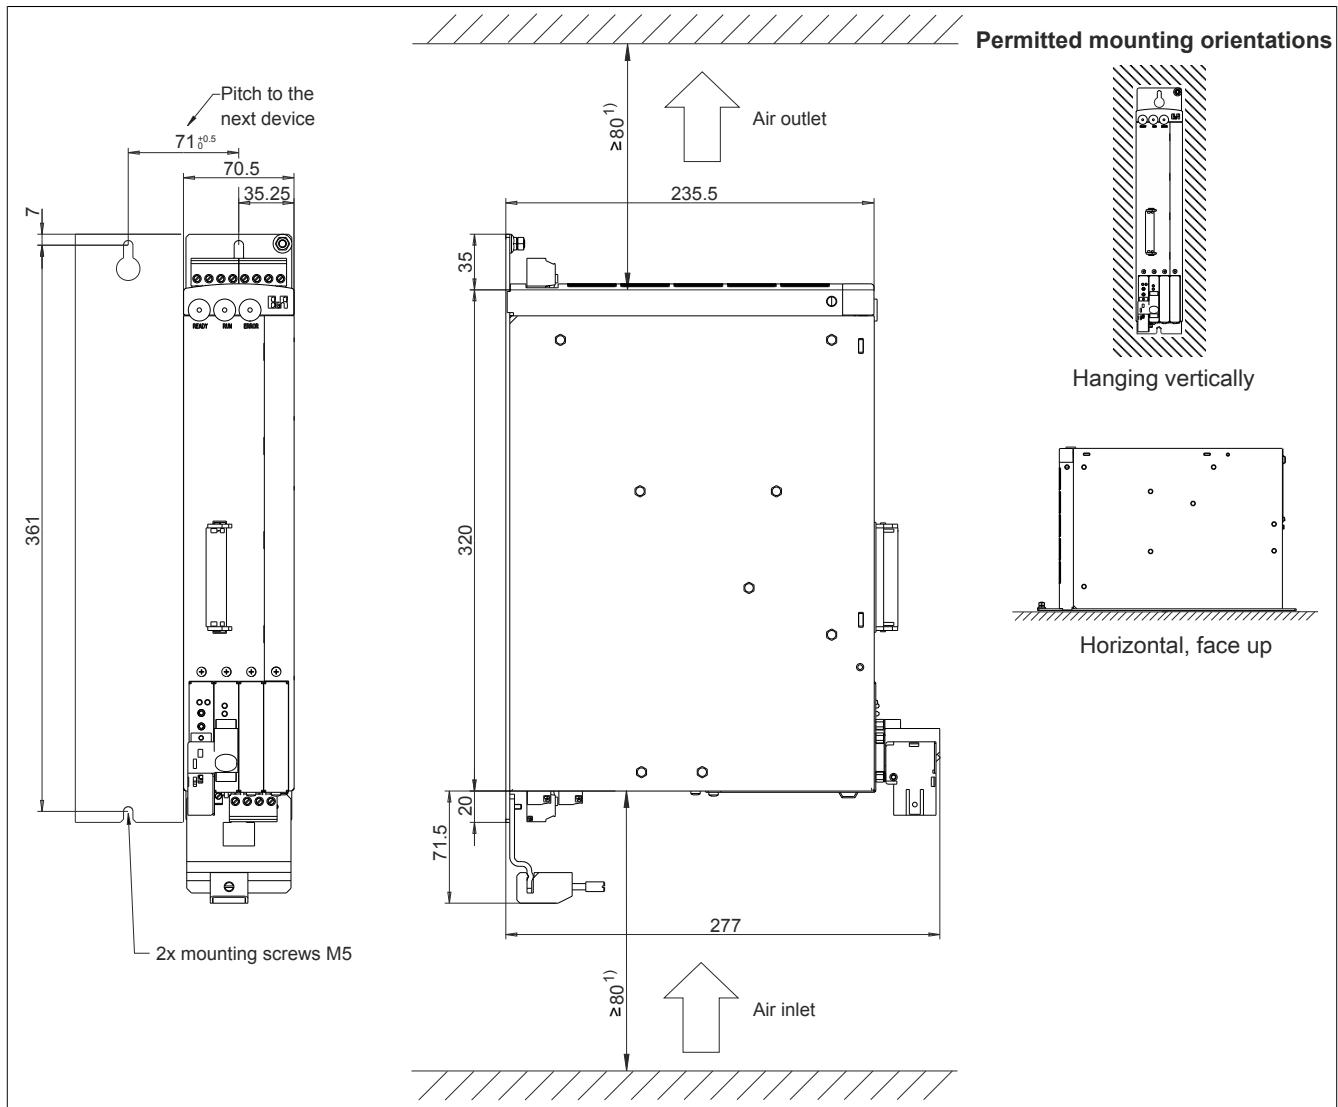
ACOPOS 1022, 1045, 1090 - Dimension diagram and installation dimensions
